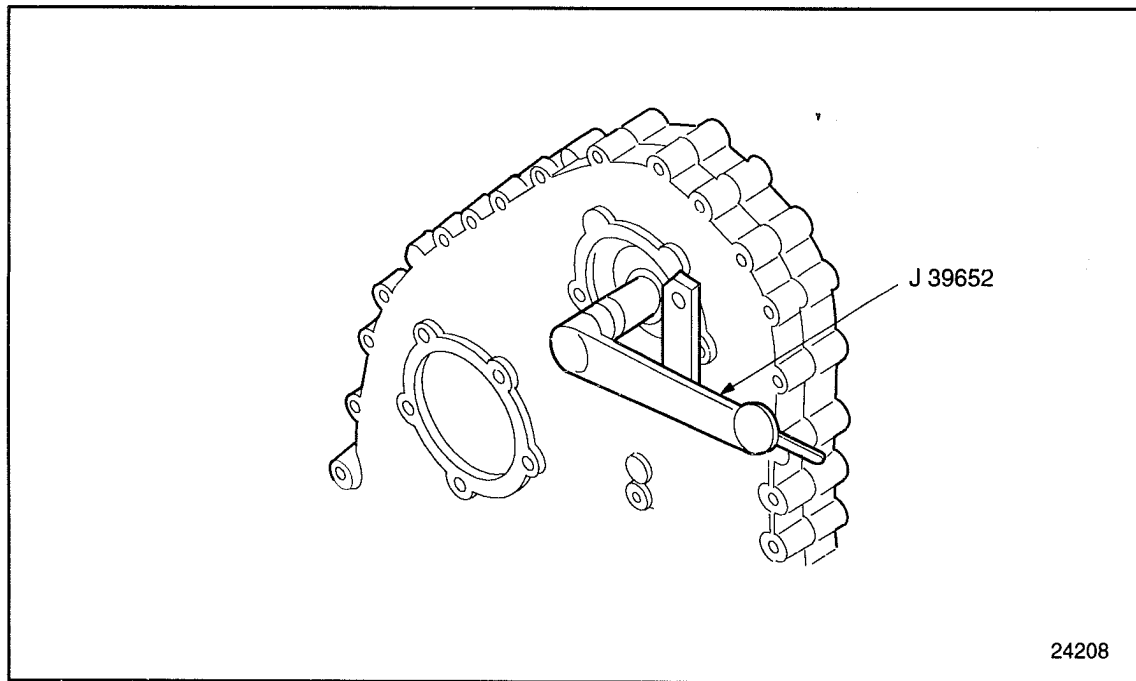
Camshaft Drive Gear-to-Camshaft Bolt Tightening
